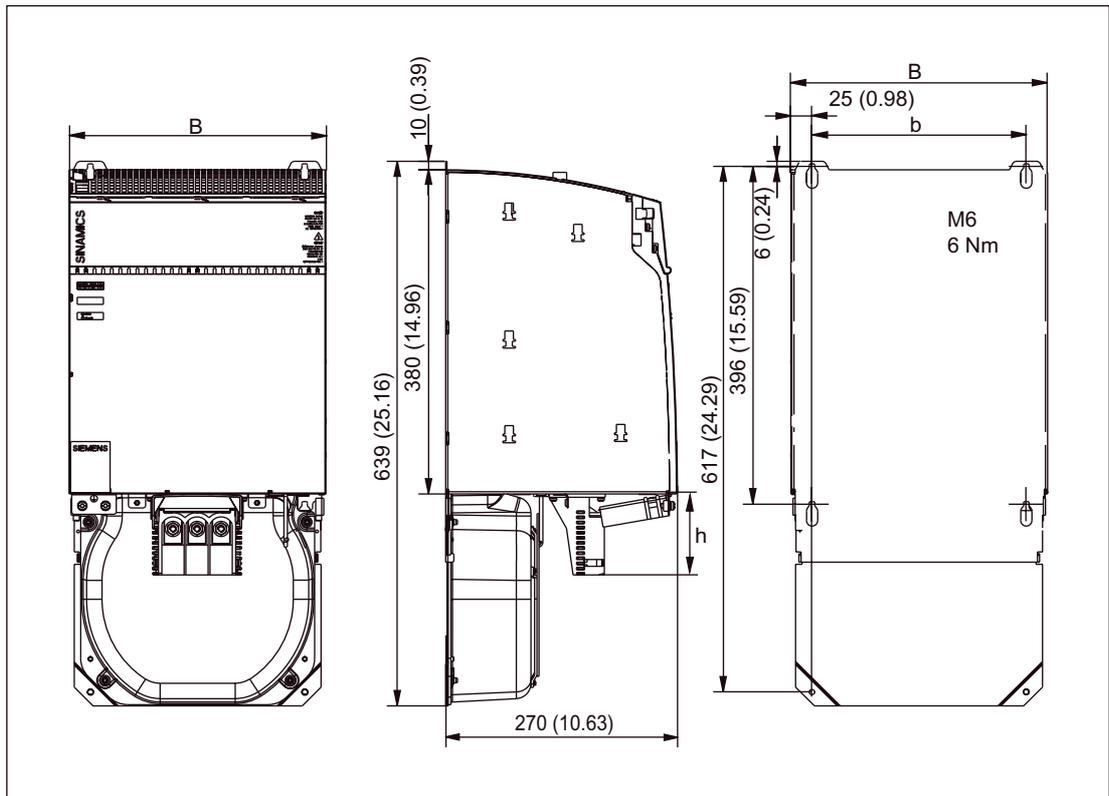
Dimension drawing of Motor Module in booksize format with internal air cooling 132 A and 200 A, all dimensions in mm and (inches)
